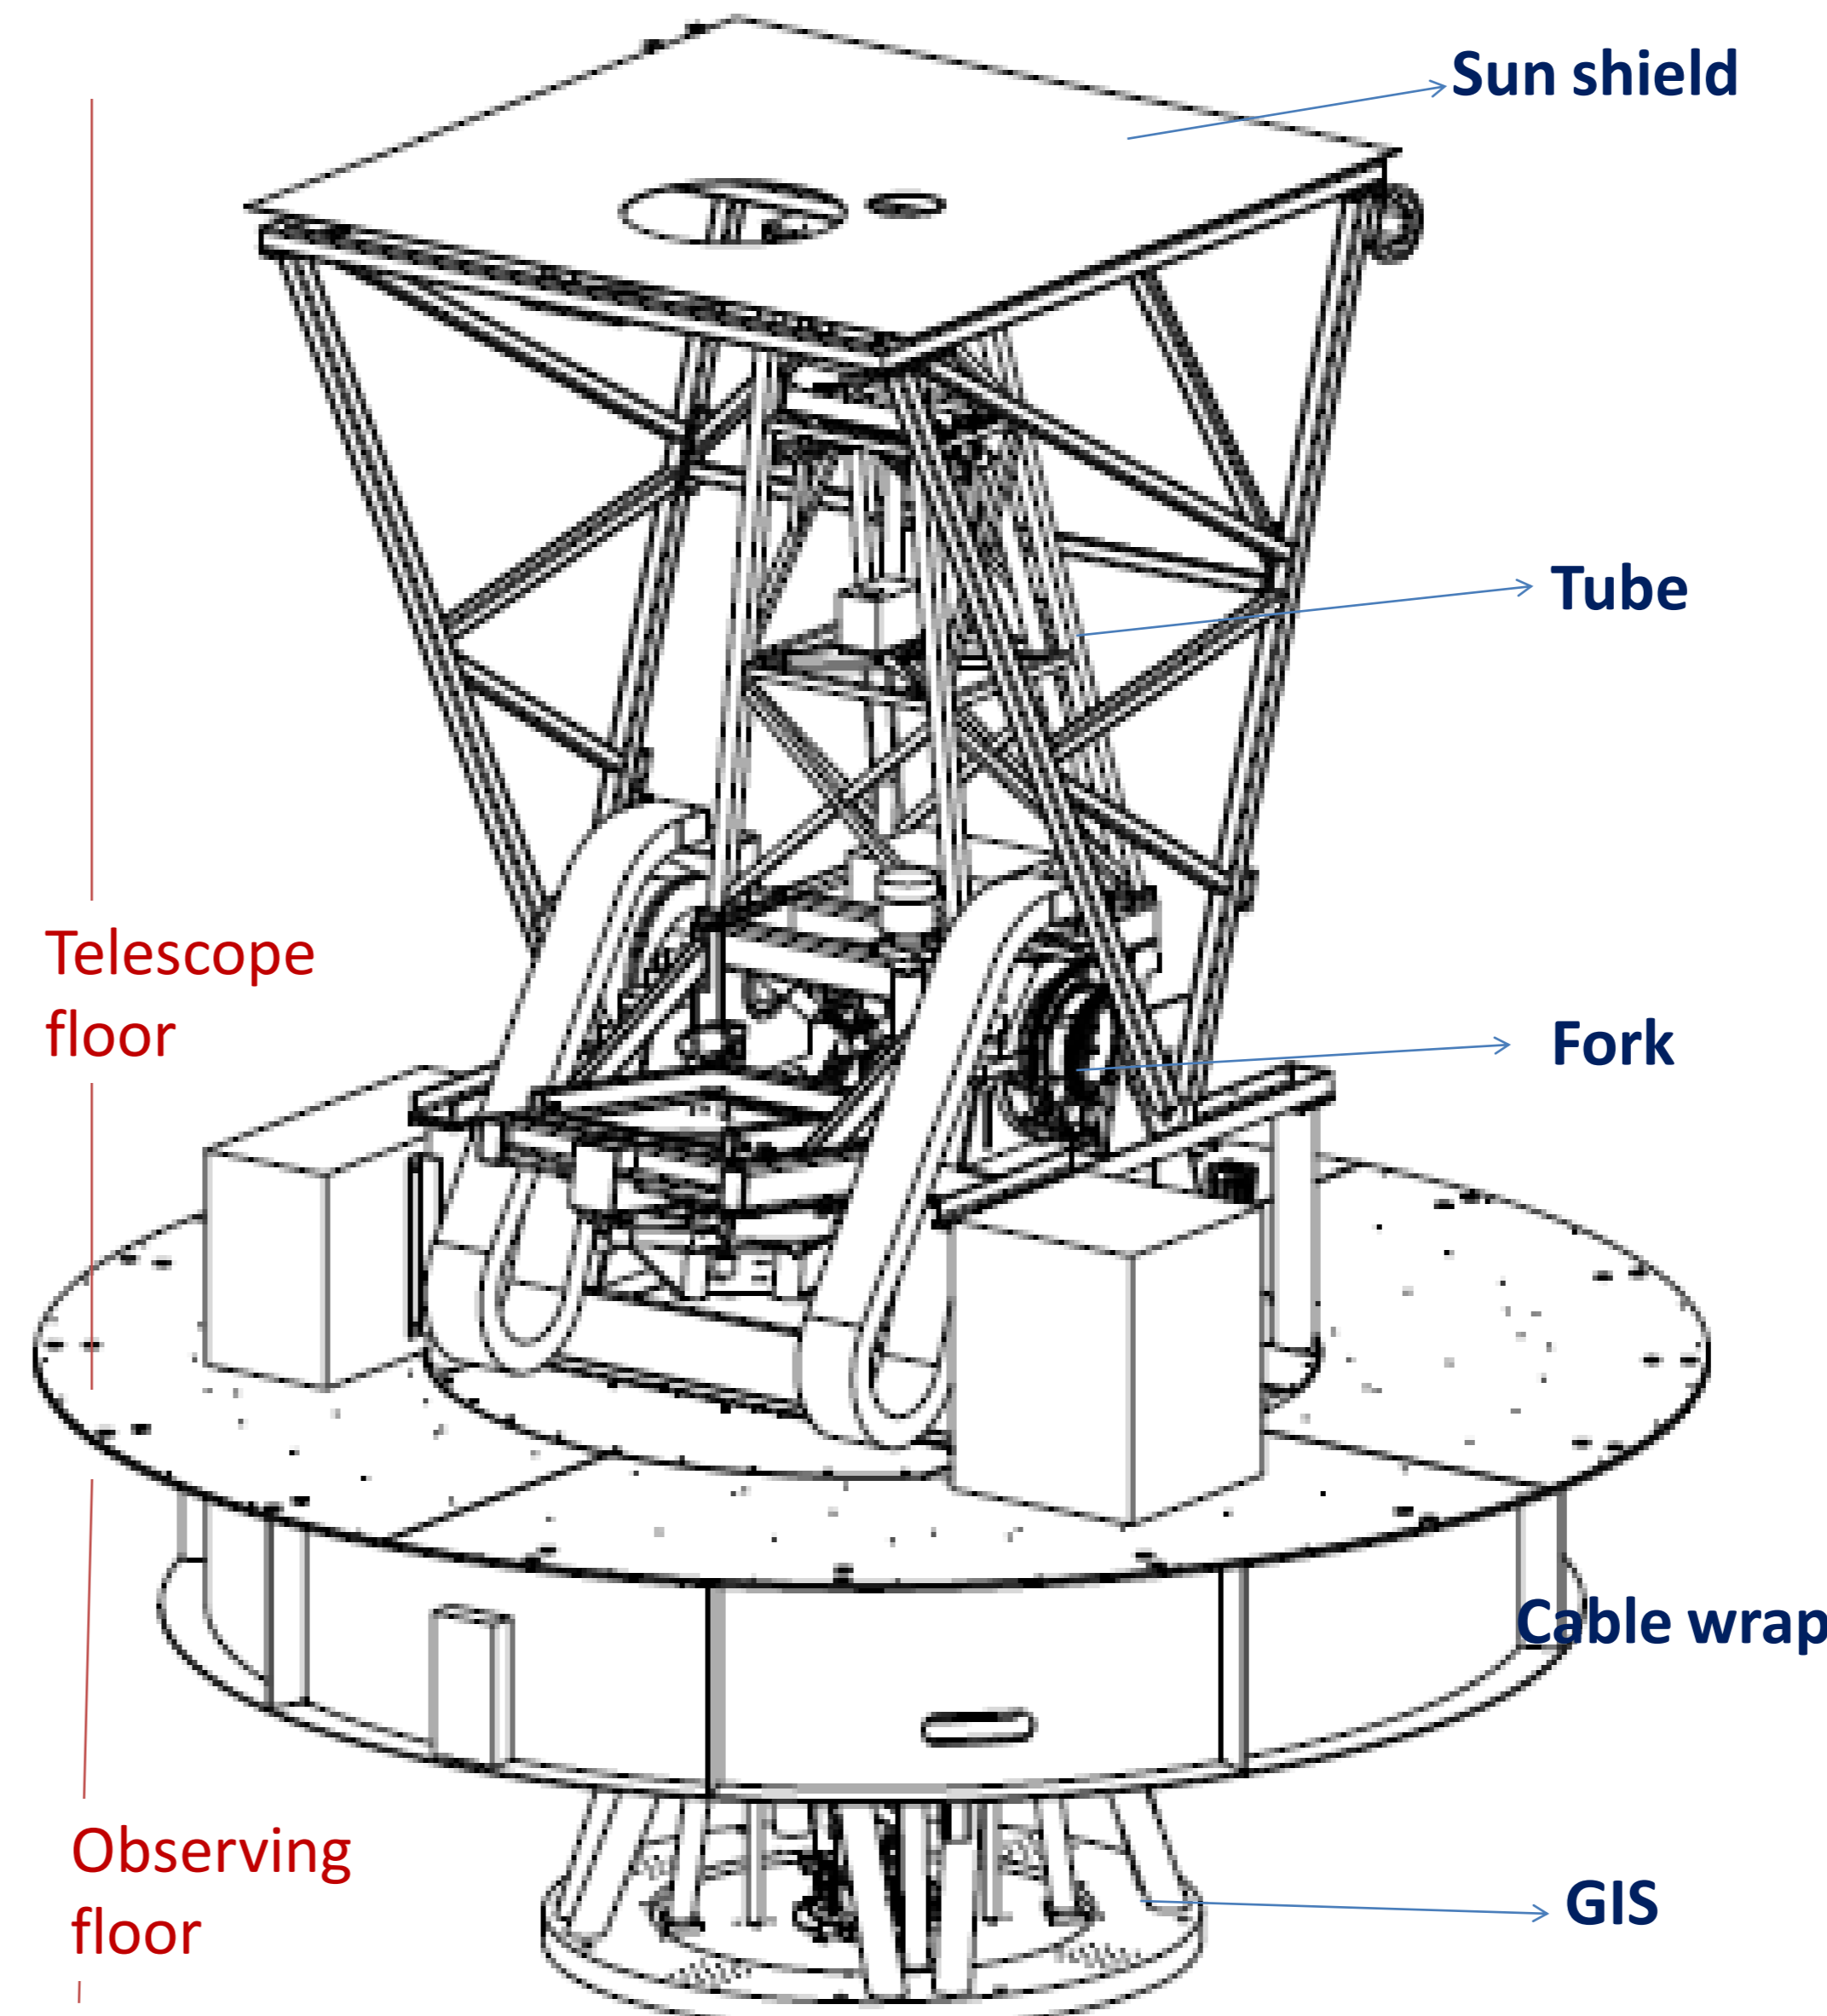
Mechanical Structure: The structure runs into two floors, telescope floor (cf. Figure 3) and observing floor (cf. Figure 4). The sunshield, tube, and fork are seen on telescope floor and GIS and cable wrap are on the observing floor. Science instruments are placed on the observing floor.
